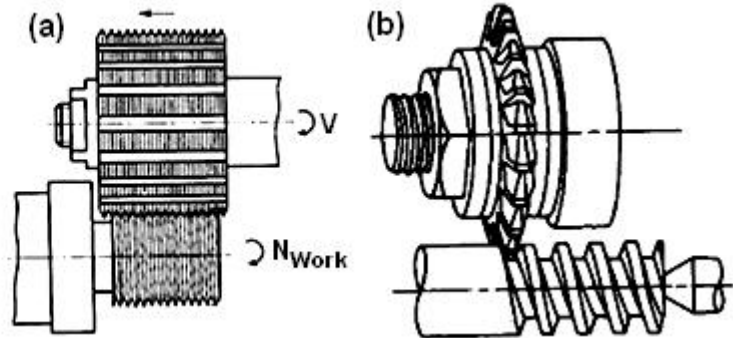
(a) Short thread milling (b) Long thread milling
